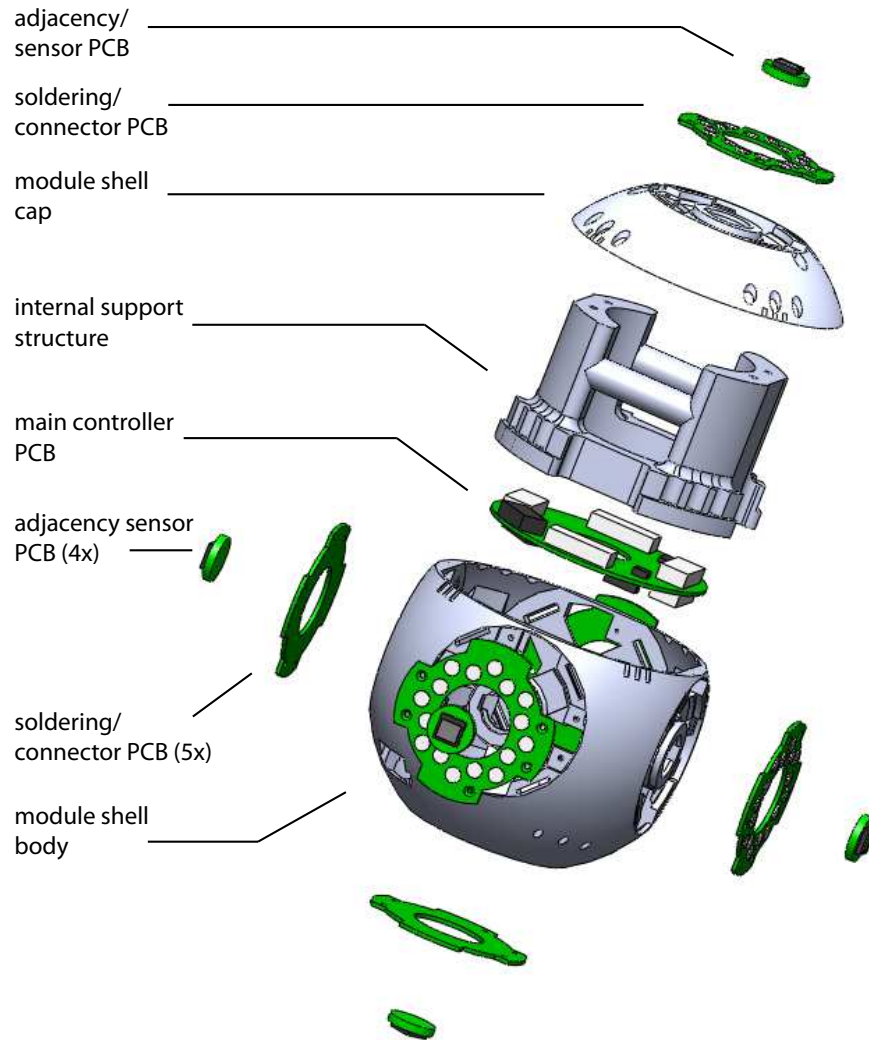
Exploded view of Soldercubes structural module. Fasteners, magnets, and wires omitted for clarity.
